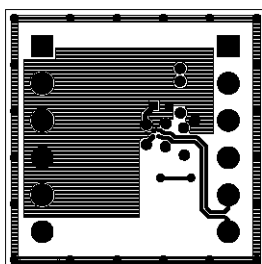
SMP-TPS7A3001-MVK Board Layer 4 – Bottom Side
